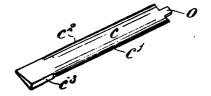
C1 is inlet edge, C2 is outlet edge.
